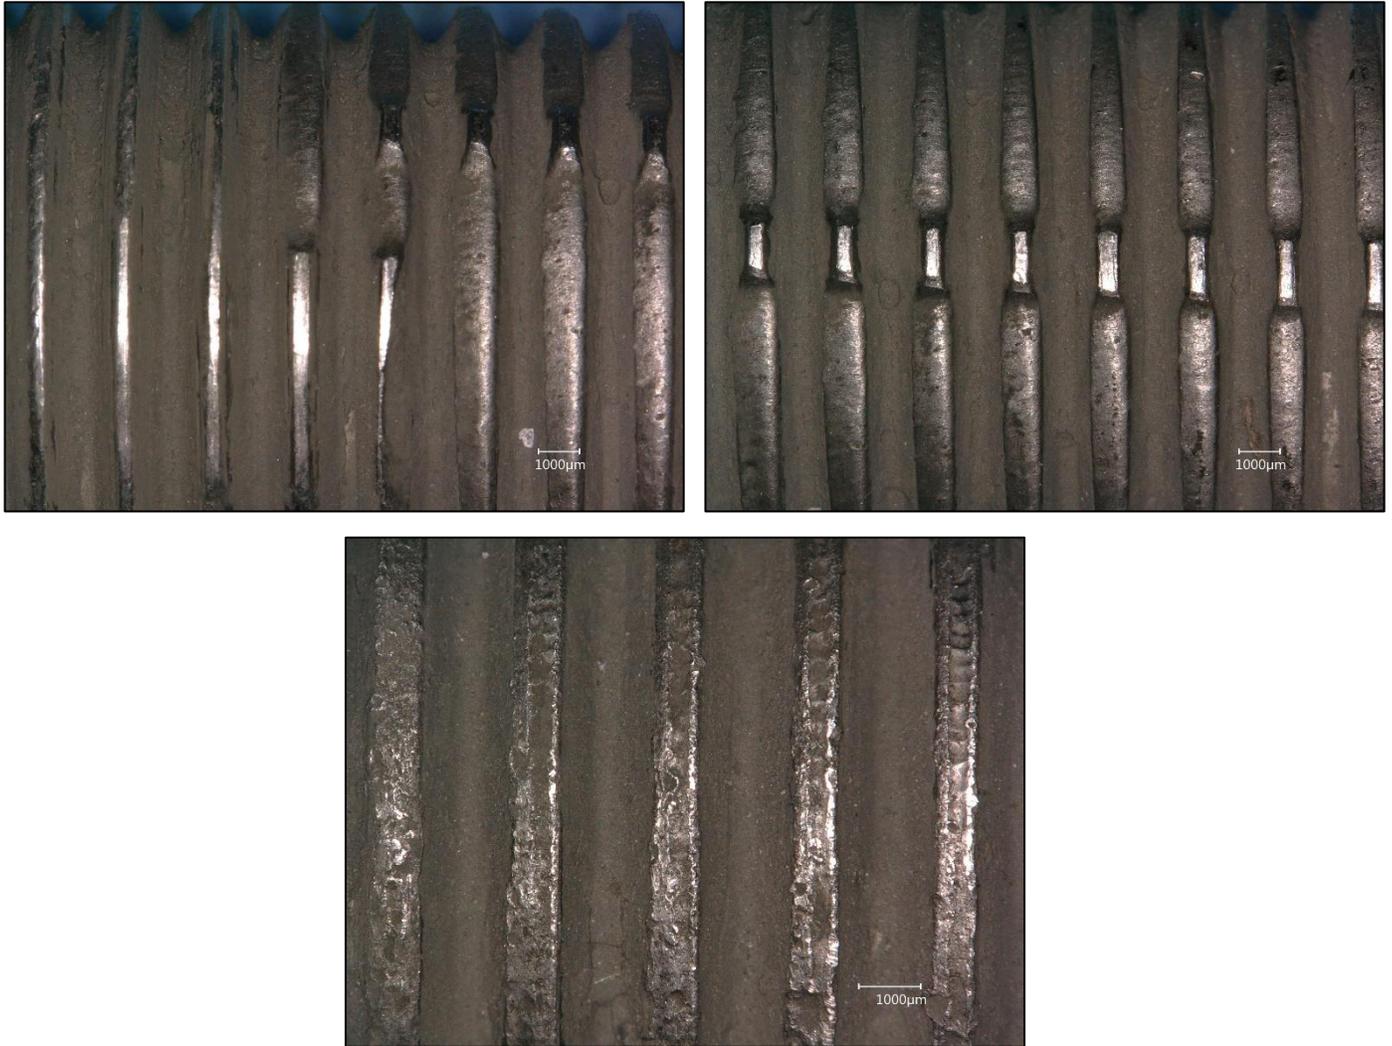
IMAGES SHOWING FEATURES OBSERVED AT AREAS OF STRIPPED THREADS ON BOLT C2.
